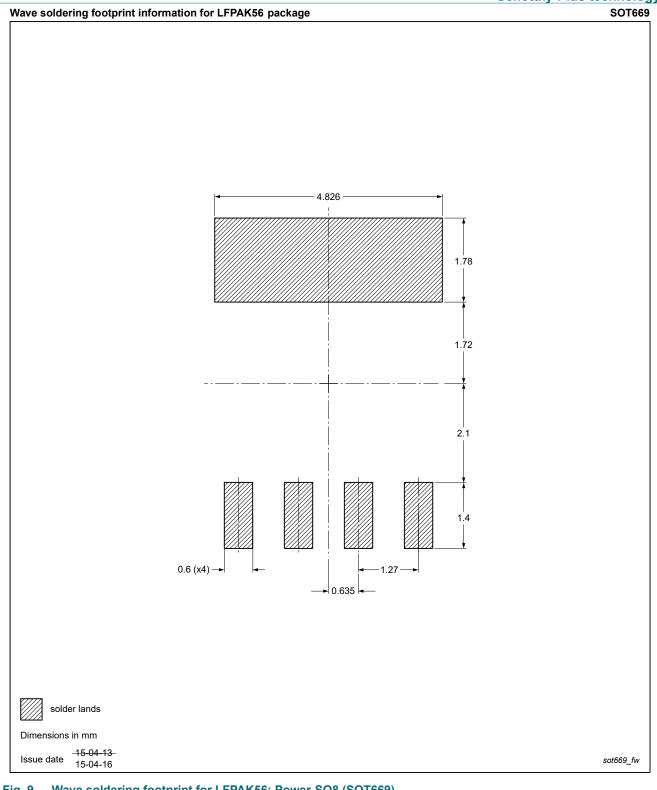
Wave soldering footprint for LFPAK56; Power-SO8 (SOT669)
